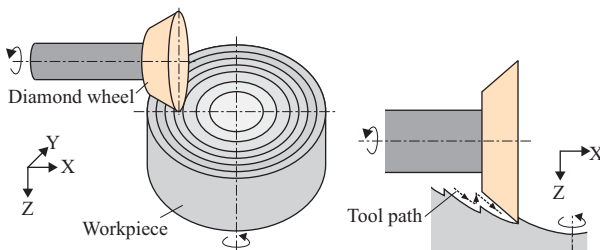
Grinding of axisymmetric surface with Fresnel shape
